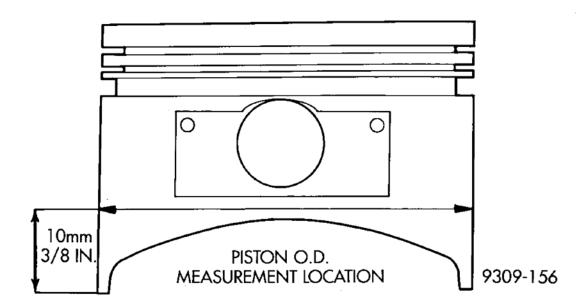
Piston Measurements Courtesy of CHRYSLER LLC
